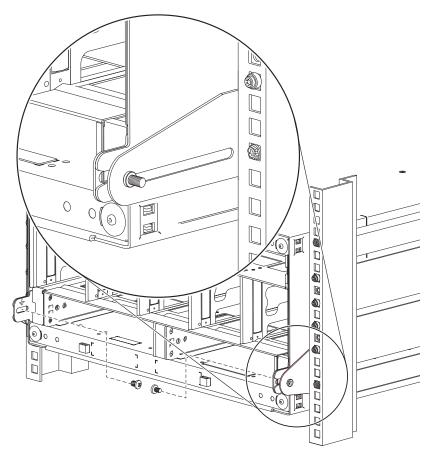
5U rear chassis connection to outer rails, detail, minus rear components for clarity
